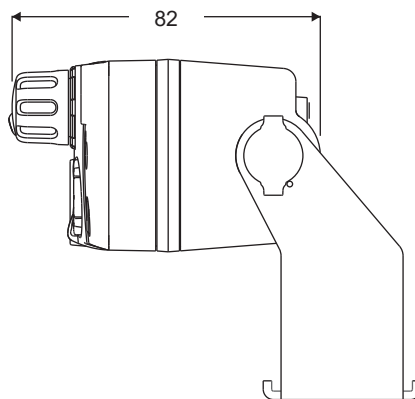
Front View of O7 Control Head with Remote Mount and Trunnion
